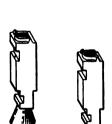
The Oddur type-bar machine. Front view of mould. Scale: twice full size.
